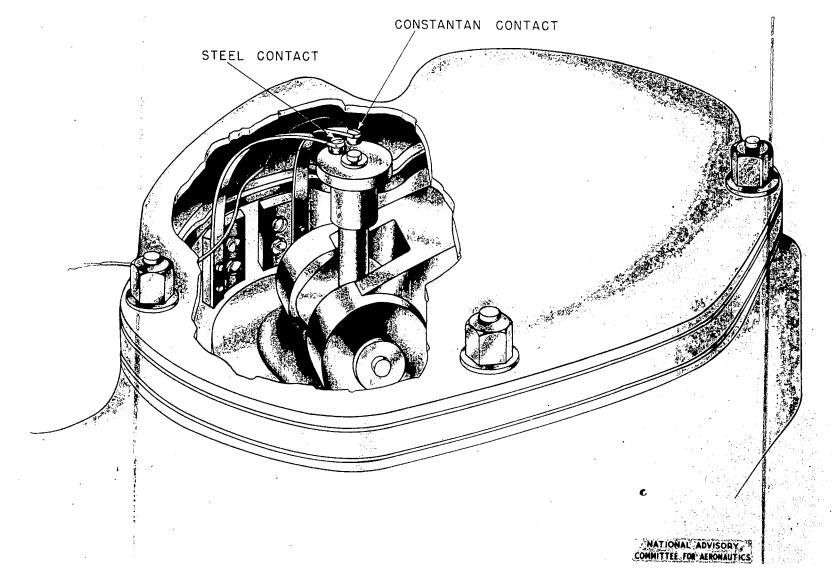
General arrangement of exhaust-valve thermocouple contacts inside rocker-box of engine cylinder.
